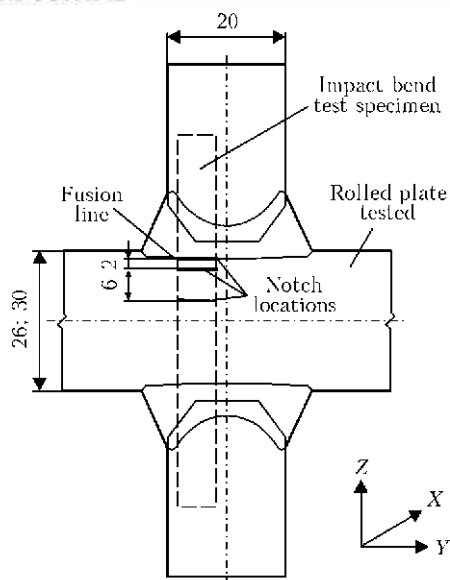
Scheme of cutting out of specimens from cruciform welded joints with indication of locations of notches
